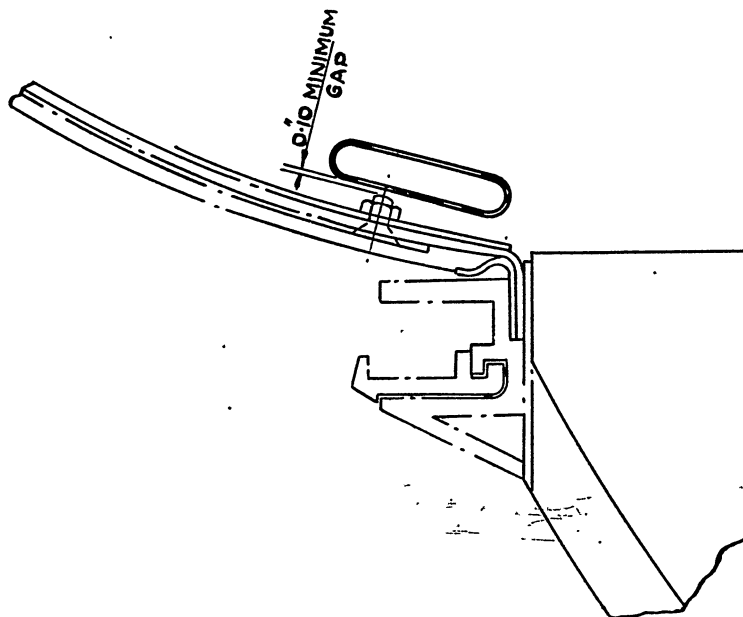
VIEW ON ARROWS D-D' (FROM SHEET 1 OF DRAWING)
